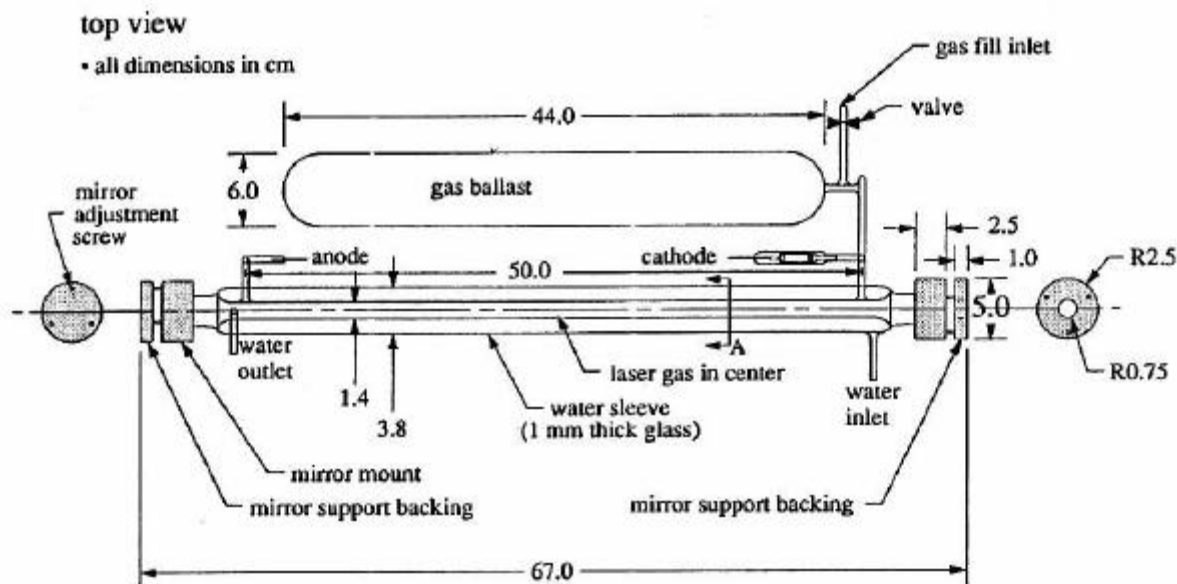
Schematic of the Sealed CO_2 Laser with Critical Dimensions
